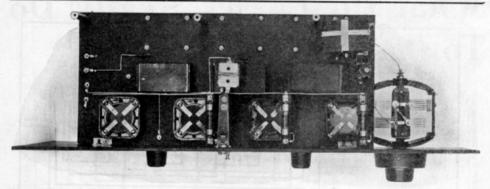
A view of the bottom, in which the arrangement of the Amperites can be seen.
